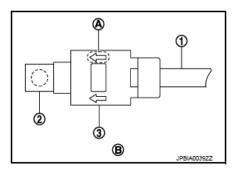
Identifying Position For Installing Quick Connector Cap Courtesy of NISSAN MOTOR CO., U.S.A.
